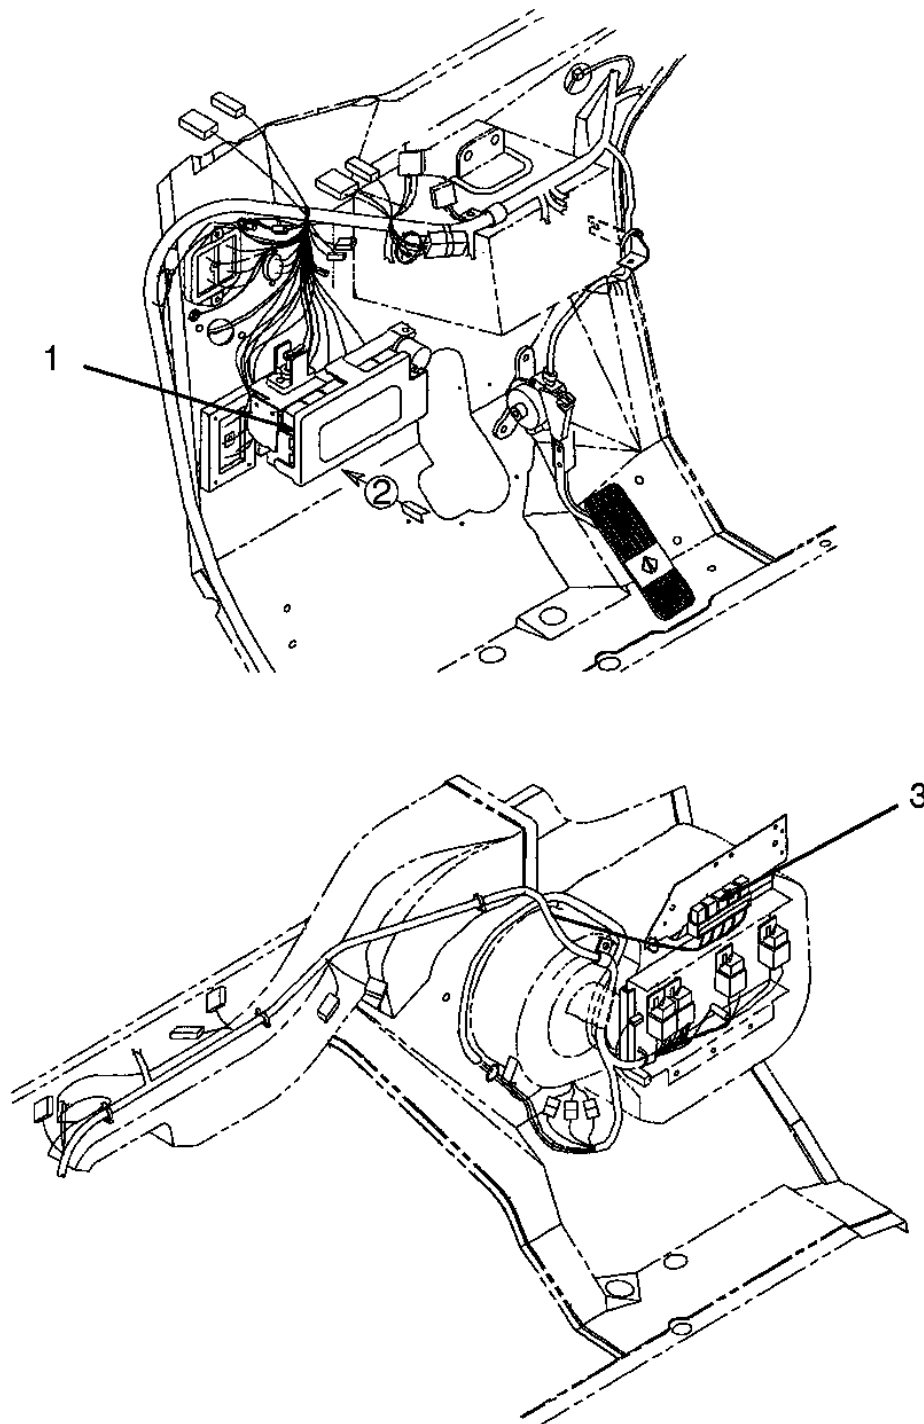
Engine Wiring – 3400, 3800 and 4000
